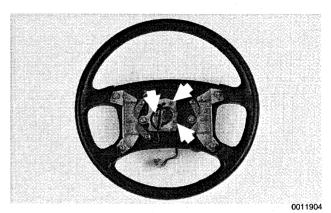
Airbag contact ring mounting fasteners (arrows).
